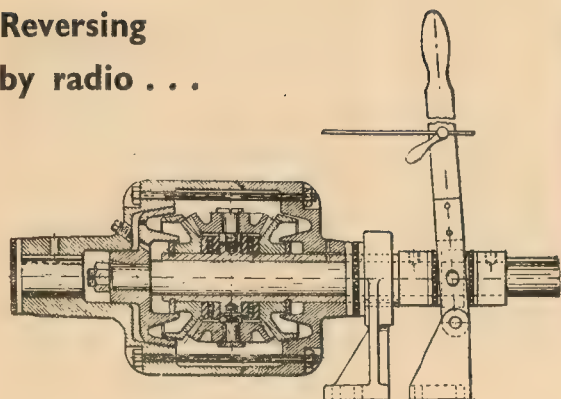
Bevel cluster type of reversing gearbox which is used in industrial and marine work
